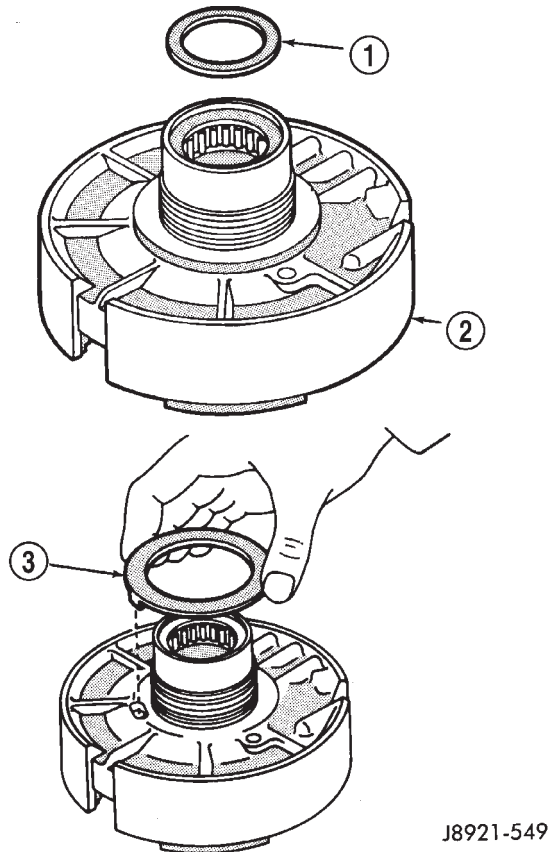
Removing Clutch Drum Thrust Washer And Race
